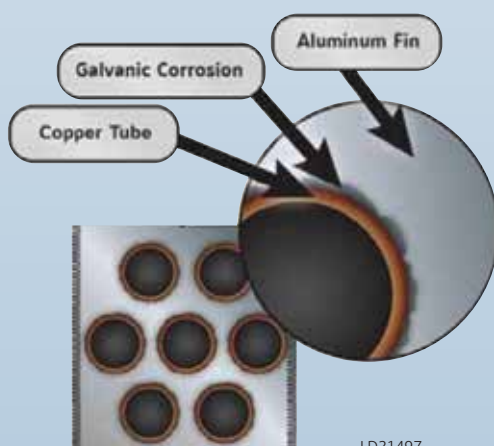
Galvanic Corrosion between Copper Tube and Aluminum Fin
